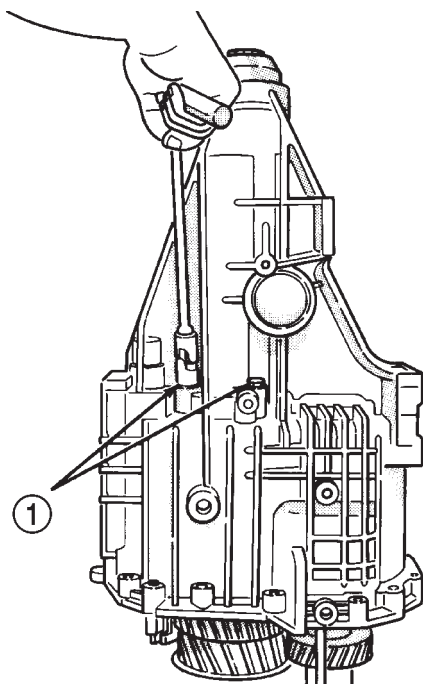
Geartrain And Housing Mounted On Fixture Tool
